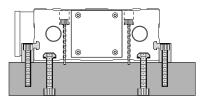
Mounting from below using T-slots or from above through mounting holes.
